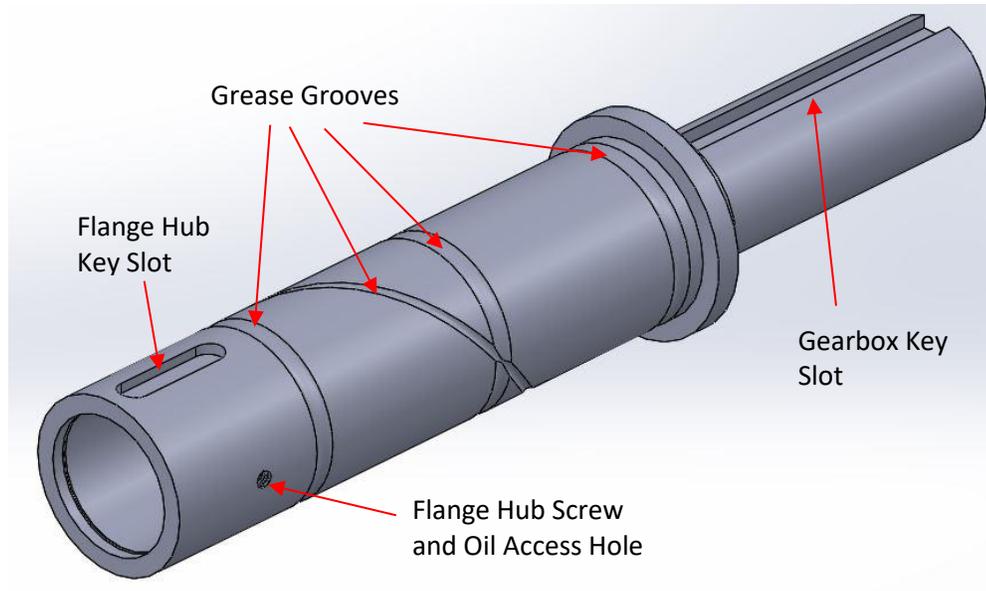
Final Drive End Design, Outer Shaft Sleeve
